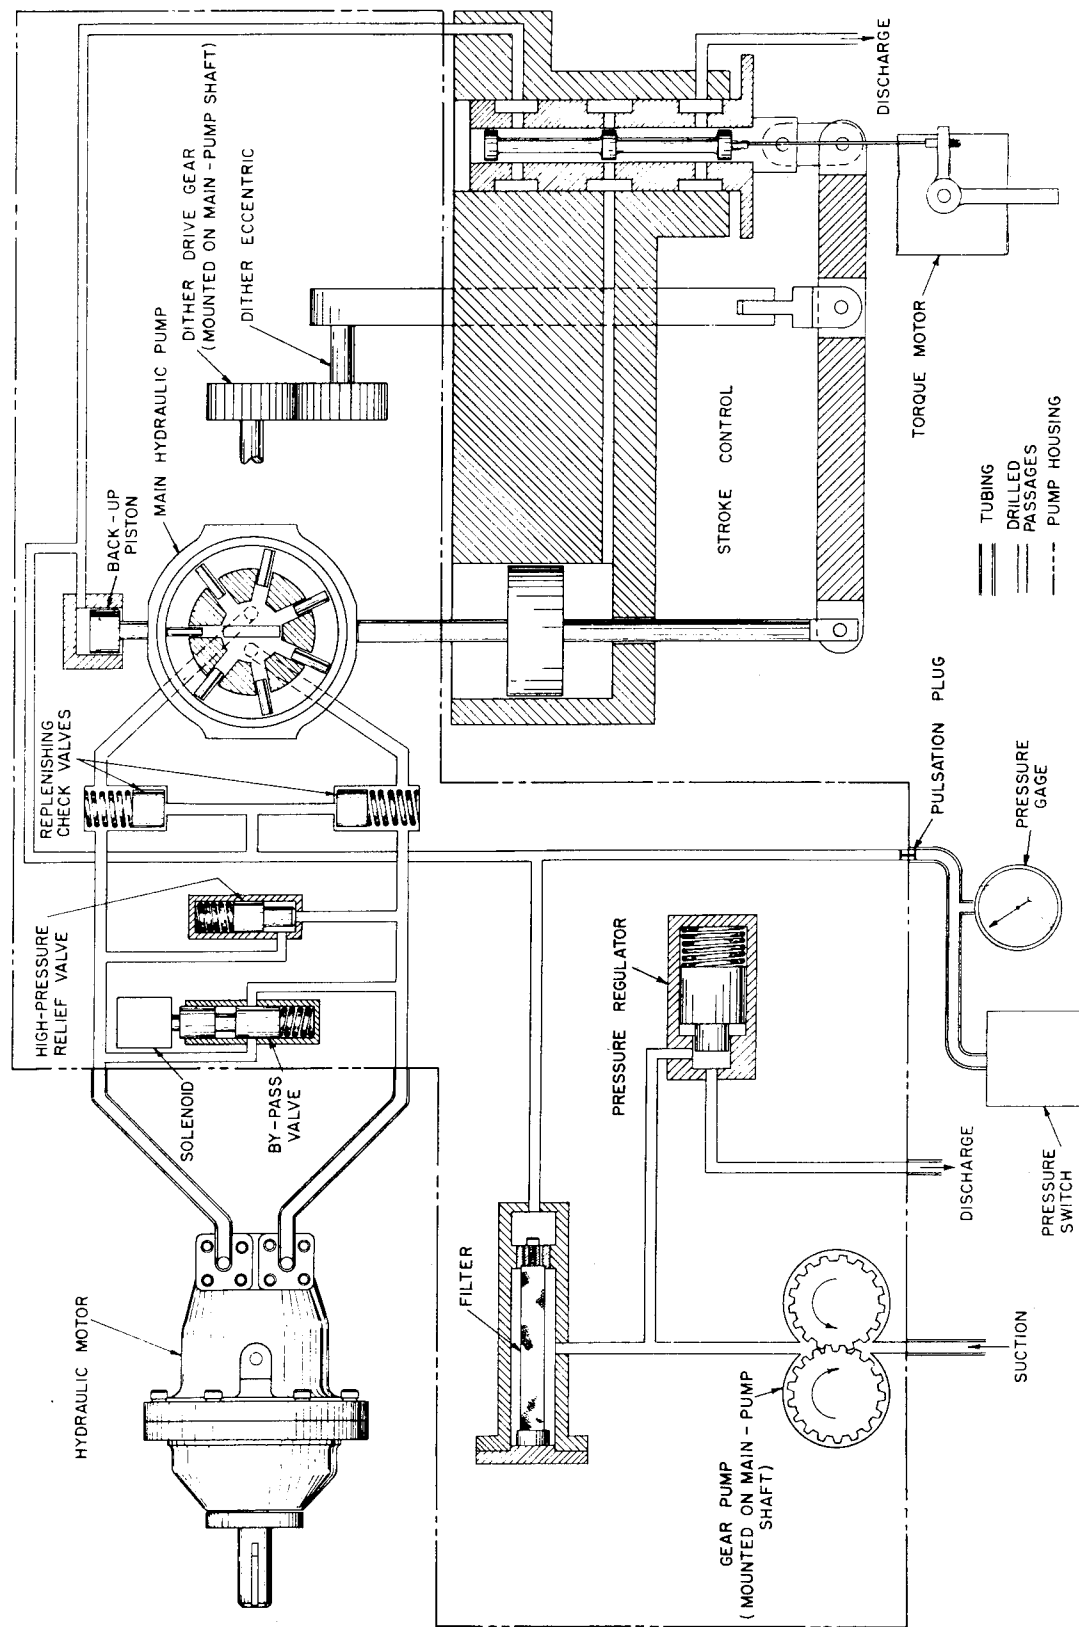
OIL CIRCUIT FOR EMERGENCY-ROD DRIVE
